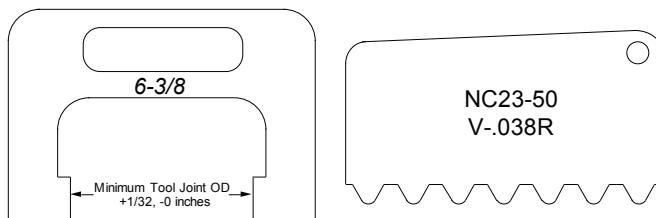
A gage for checking tool joint box wear (left). Hardened and ground profile gage for checking pin stretch (right).
